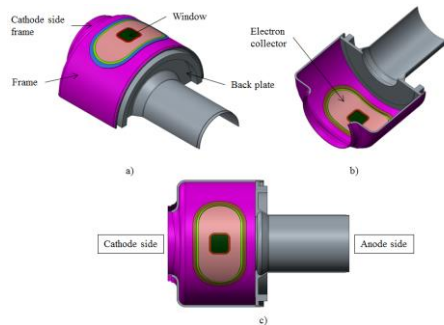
X-ray metal tube envelope (a) Isometric view-1, (b) Isometric view-2 and (c) Bottom view
